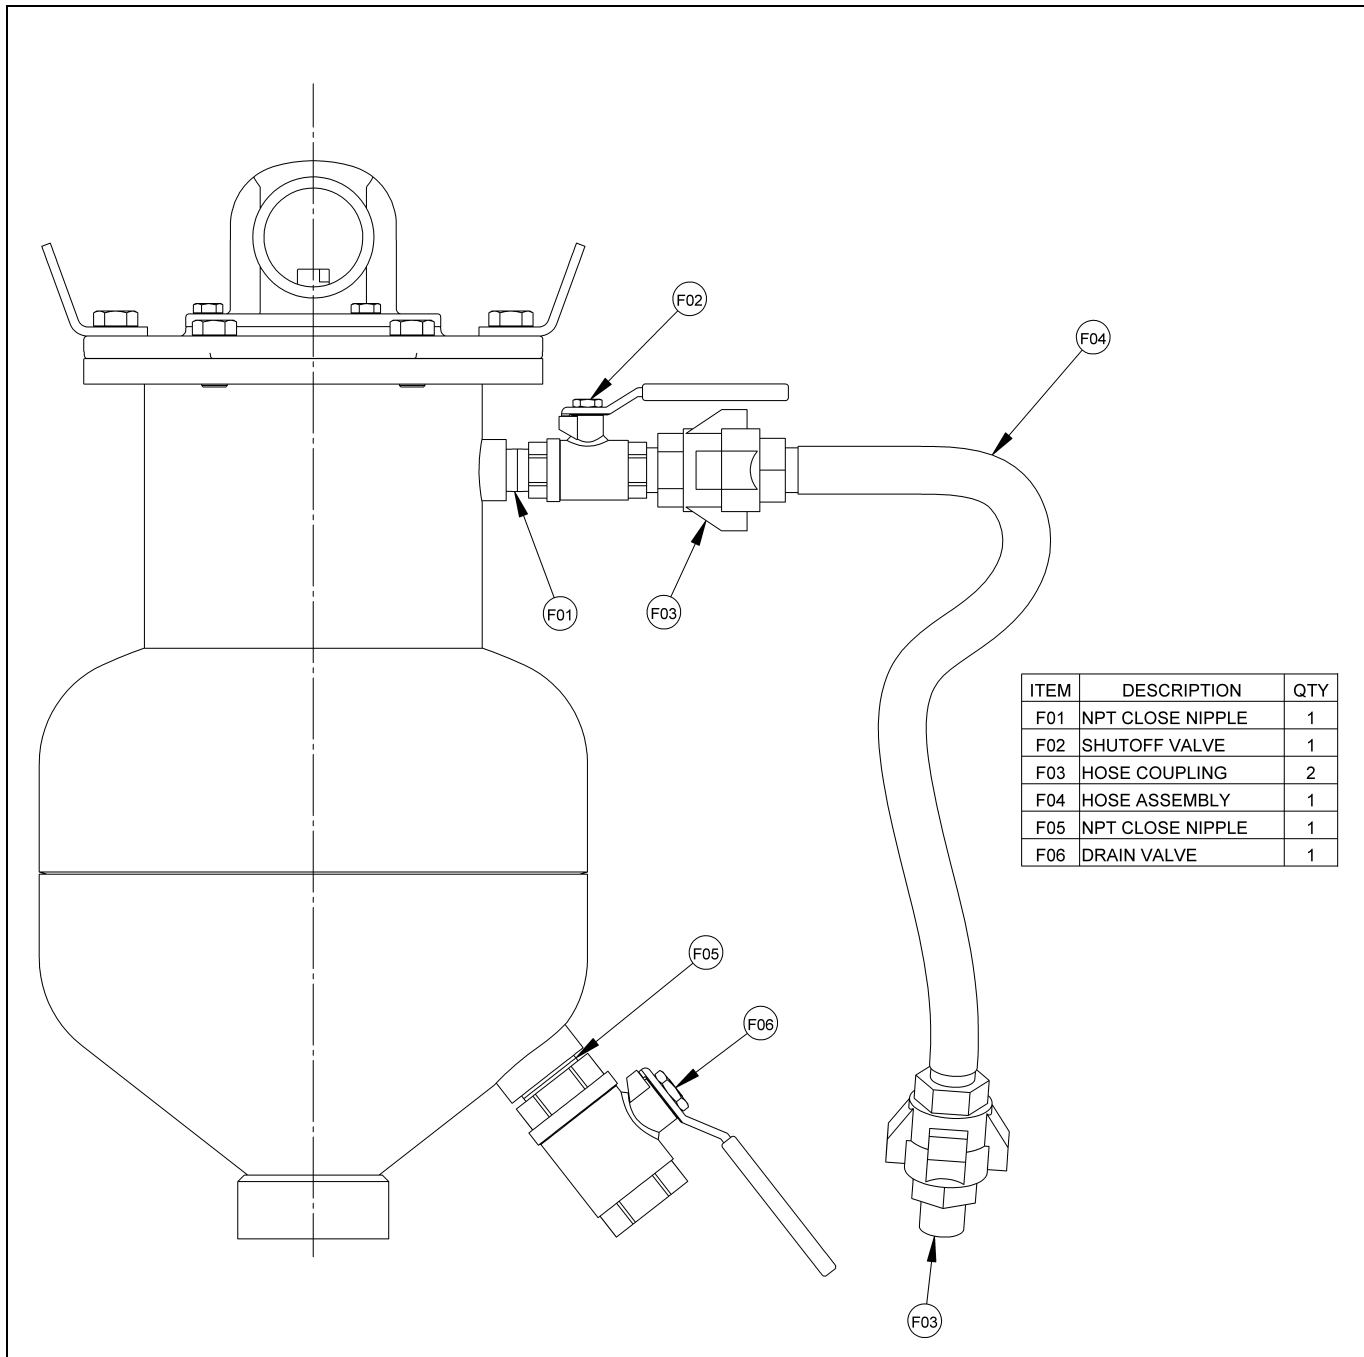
ASU-SCAV with Optional Backflush Attachment Parts Identification
